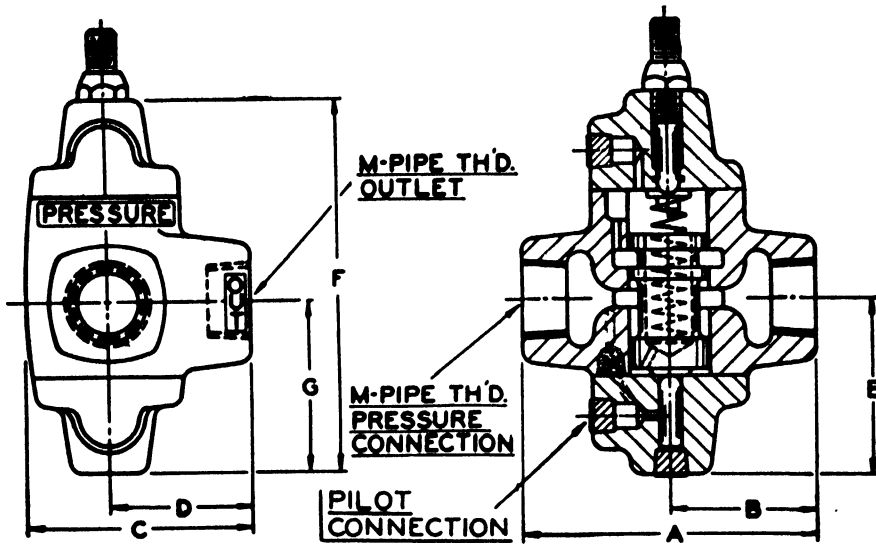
Unloading valve. (Gerotor May Corp., Baltimore, Md.)
